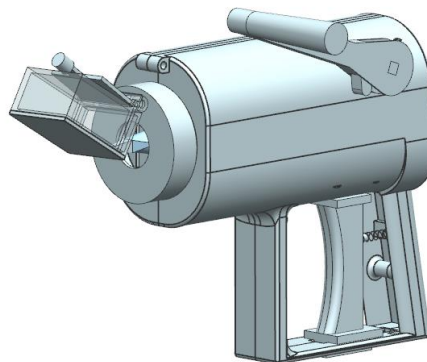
MACS-Tool Full Assembly Left-Hand Configuration
